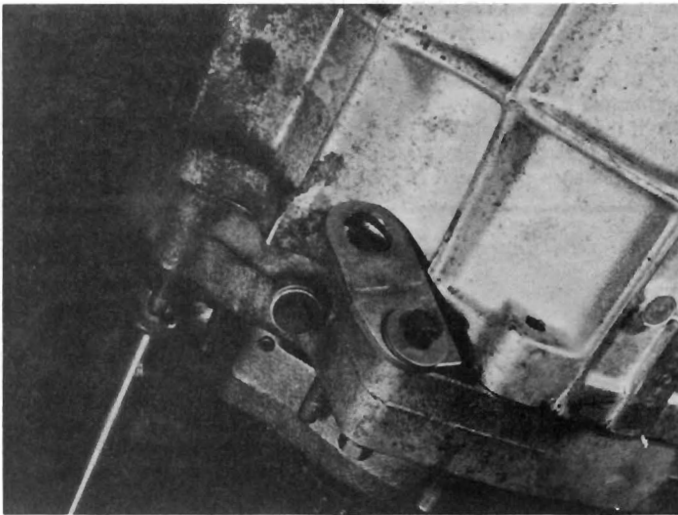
Correct alignment of final drive housing flexible bush (Sec 11)
